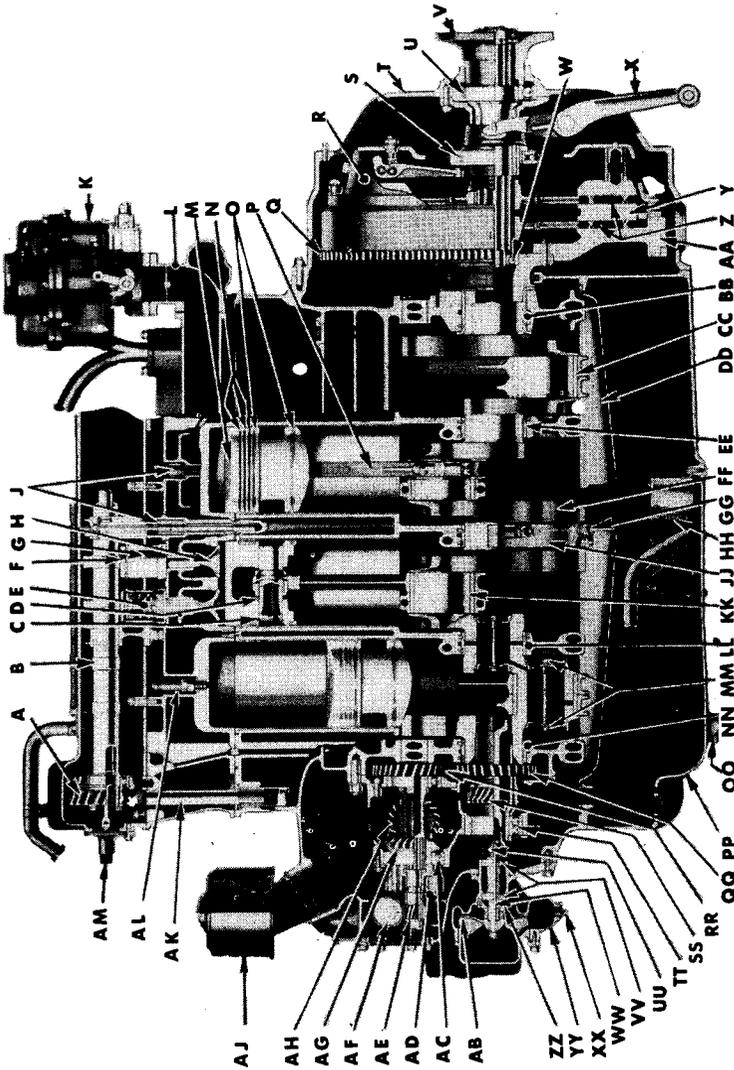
Early Type GAA Engine — Longitudinal Sectional View
